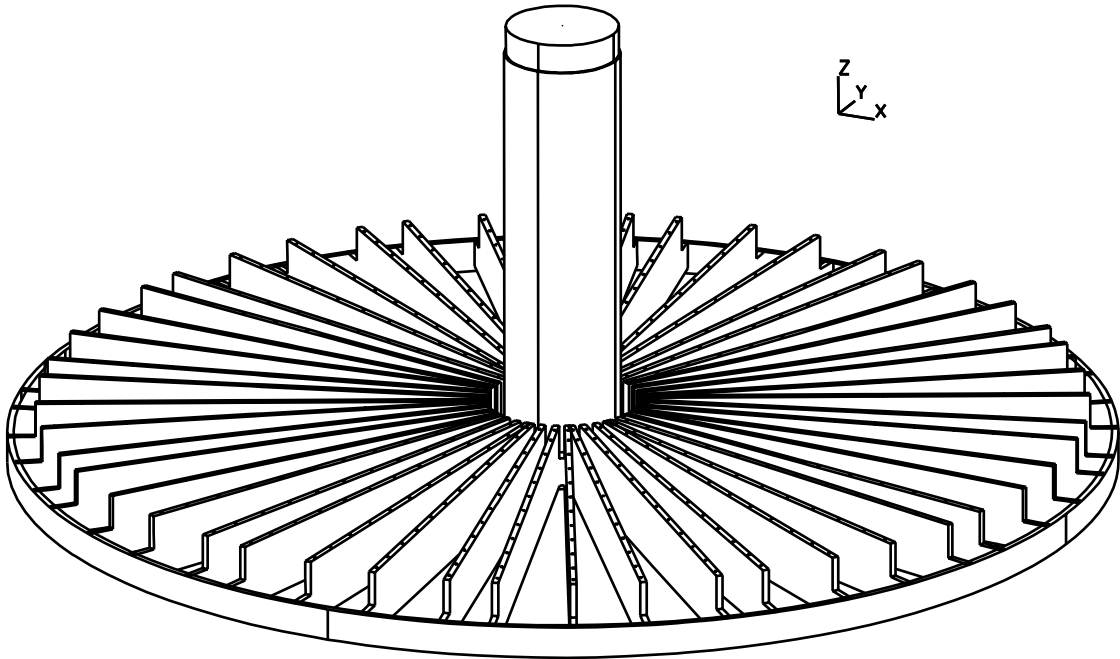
Jack Center Tooling into Bottom Tooling and Mate Precision Surfaces
